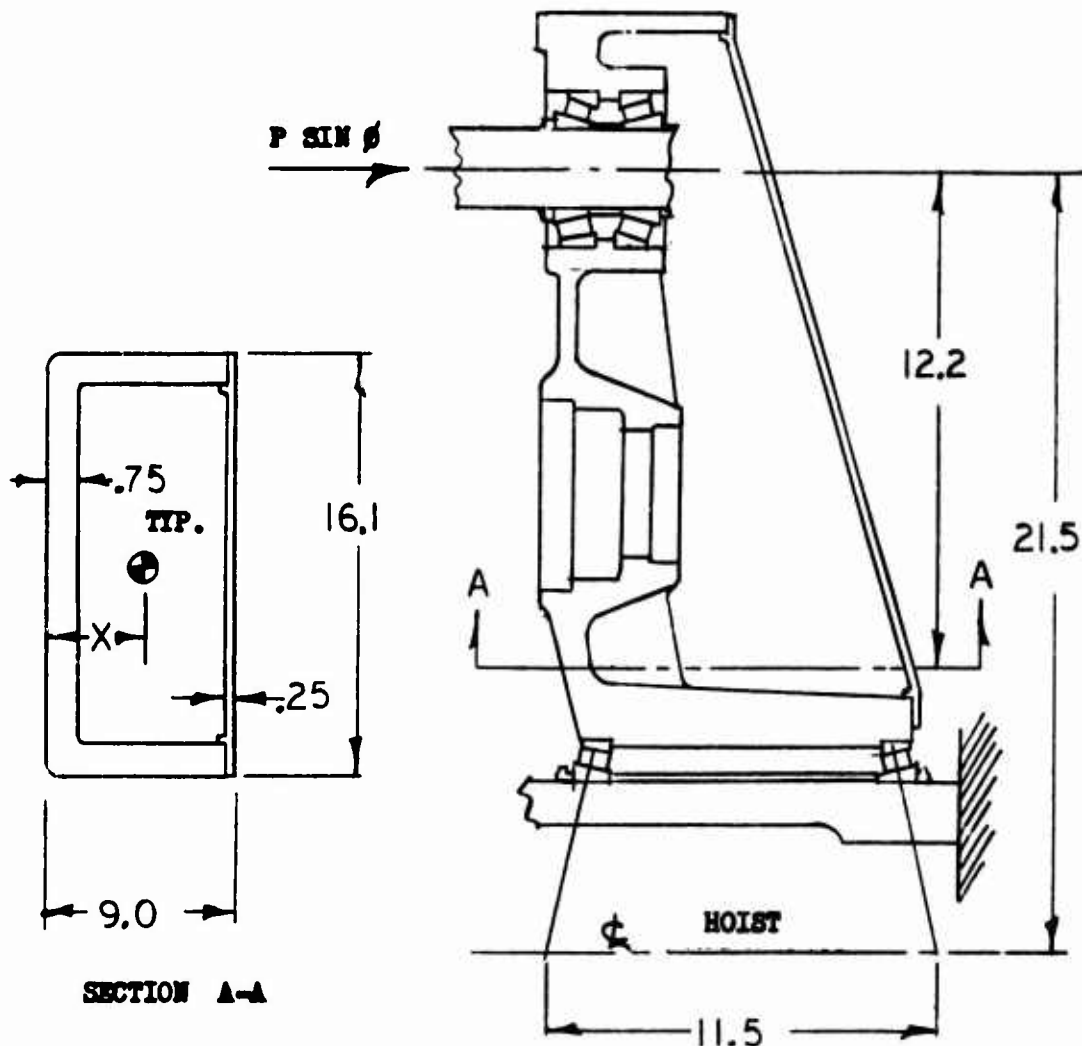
Critical Section, Level Wind Mechanism, Single-Point Hoist.
